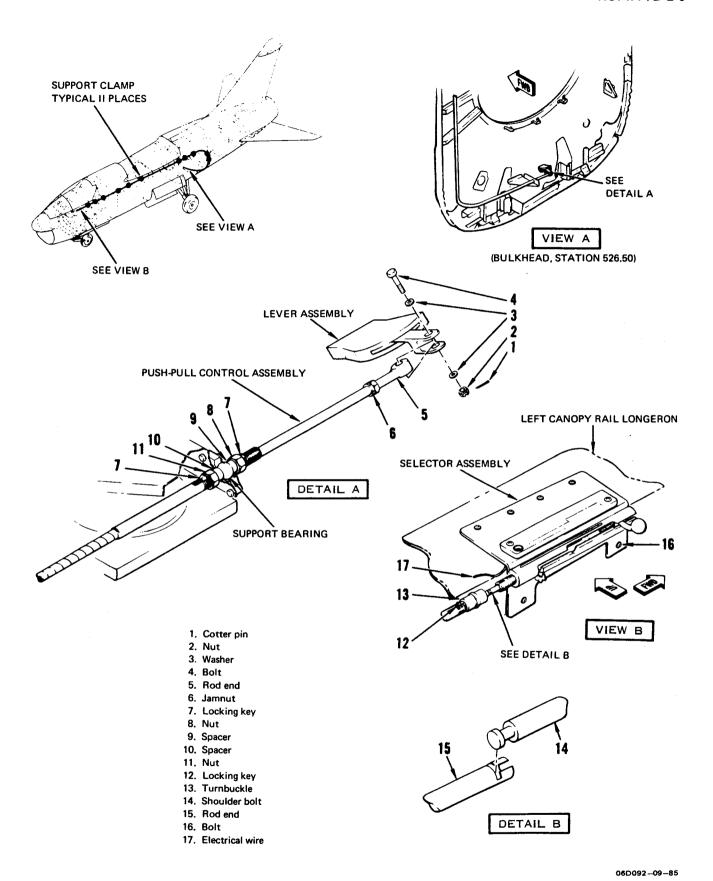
Removal and Installation; Alternate Fuel Feed Push-Pull Control Assembly
